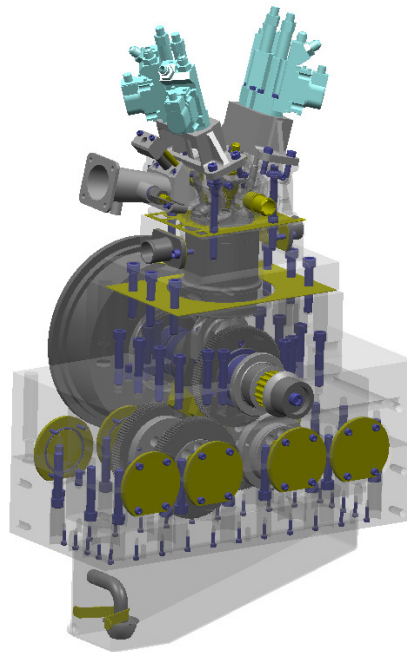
Ghosted CAD image of test engine showing Active Valve Train system fitted to cylinder head and provision for full balancing set (primary balance system only shown) (Illustration courtesy Lotus Engineering)
